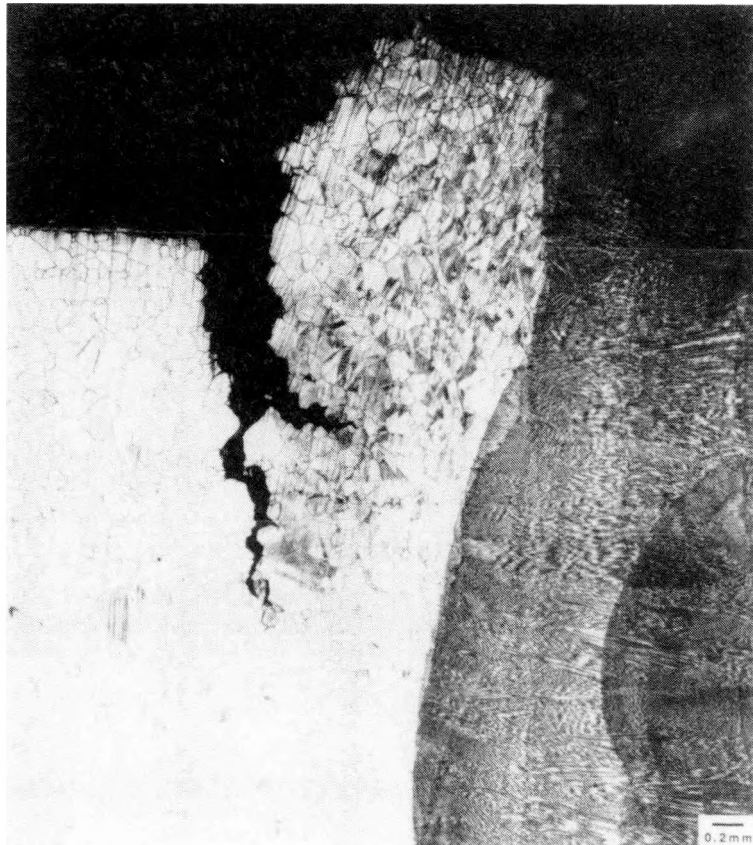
Cross Section of a 1TCT Weld Overlay Specimen Showing Crack Branching and Propagation in the Base Material near the Weld Fusion Line.
